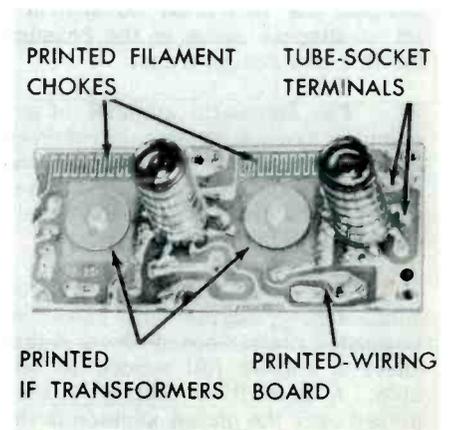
A Close-up View of the Printed IF Circuitry Employed in the RCA Chassis KCS94.
